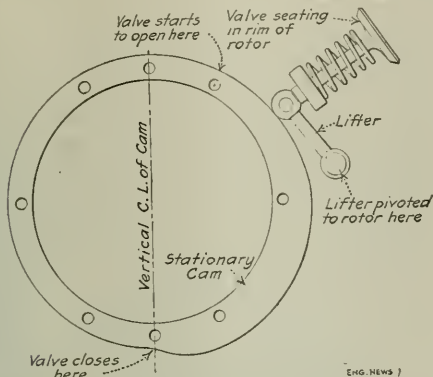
INTAKE VALVE AND VALVE-OPERATING MECHANISM OF ROTARY AIR COMPRESSOR
